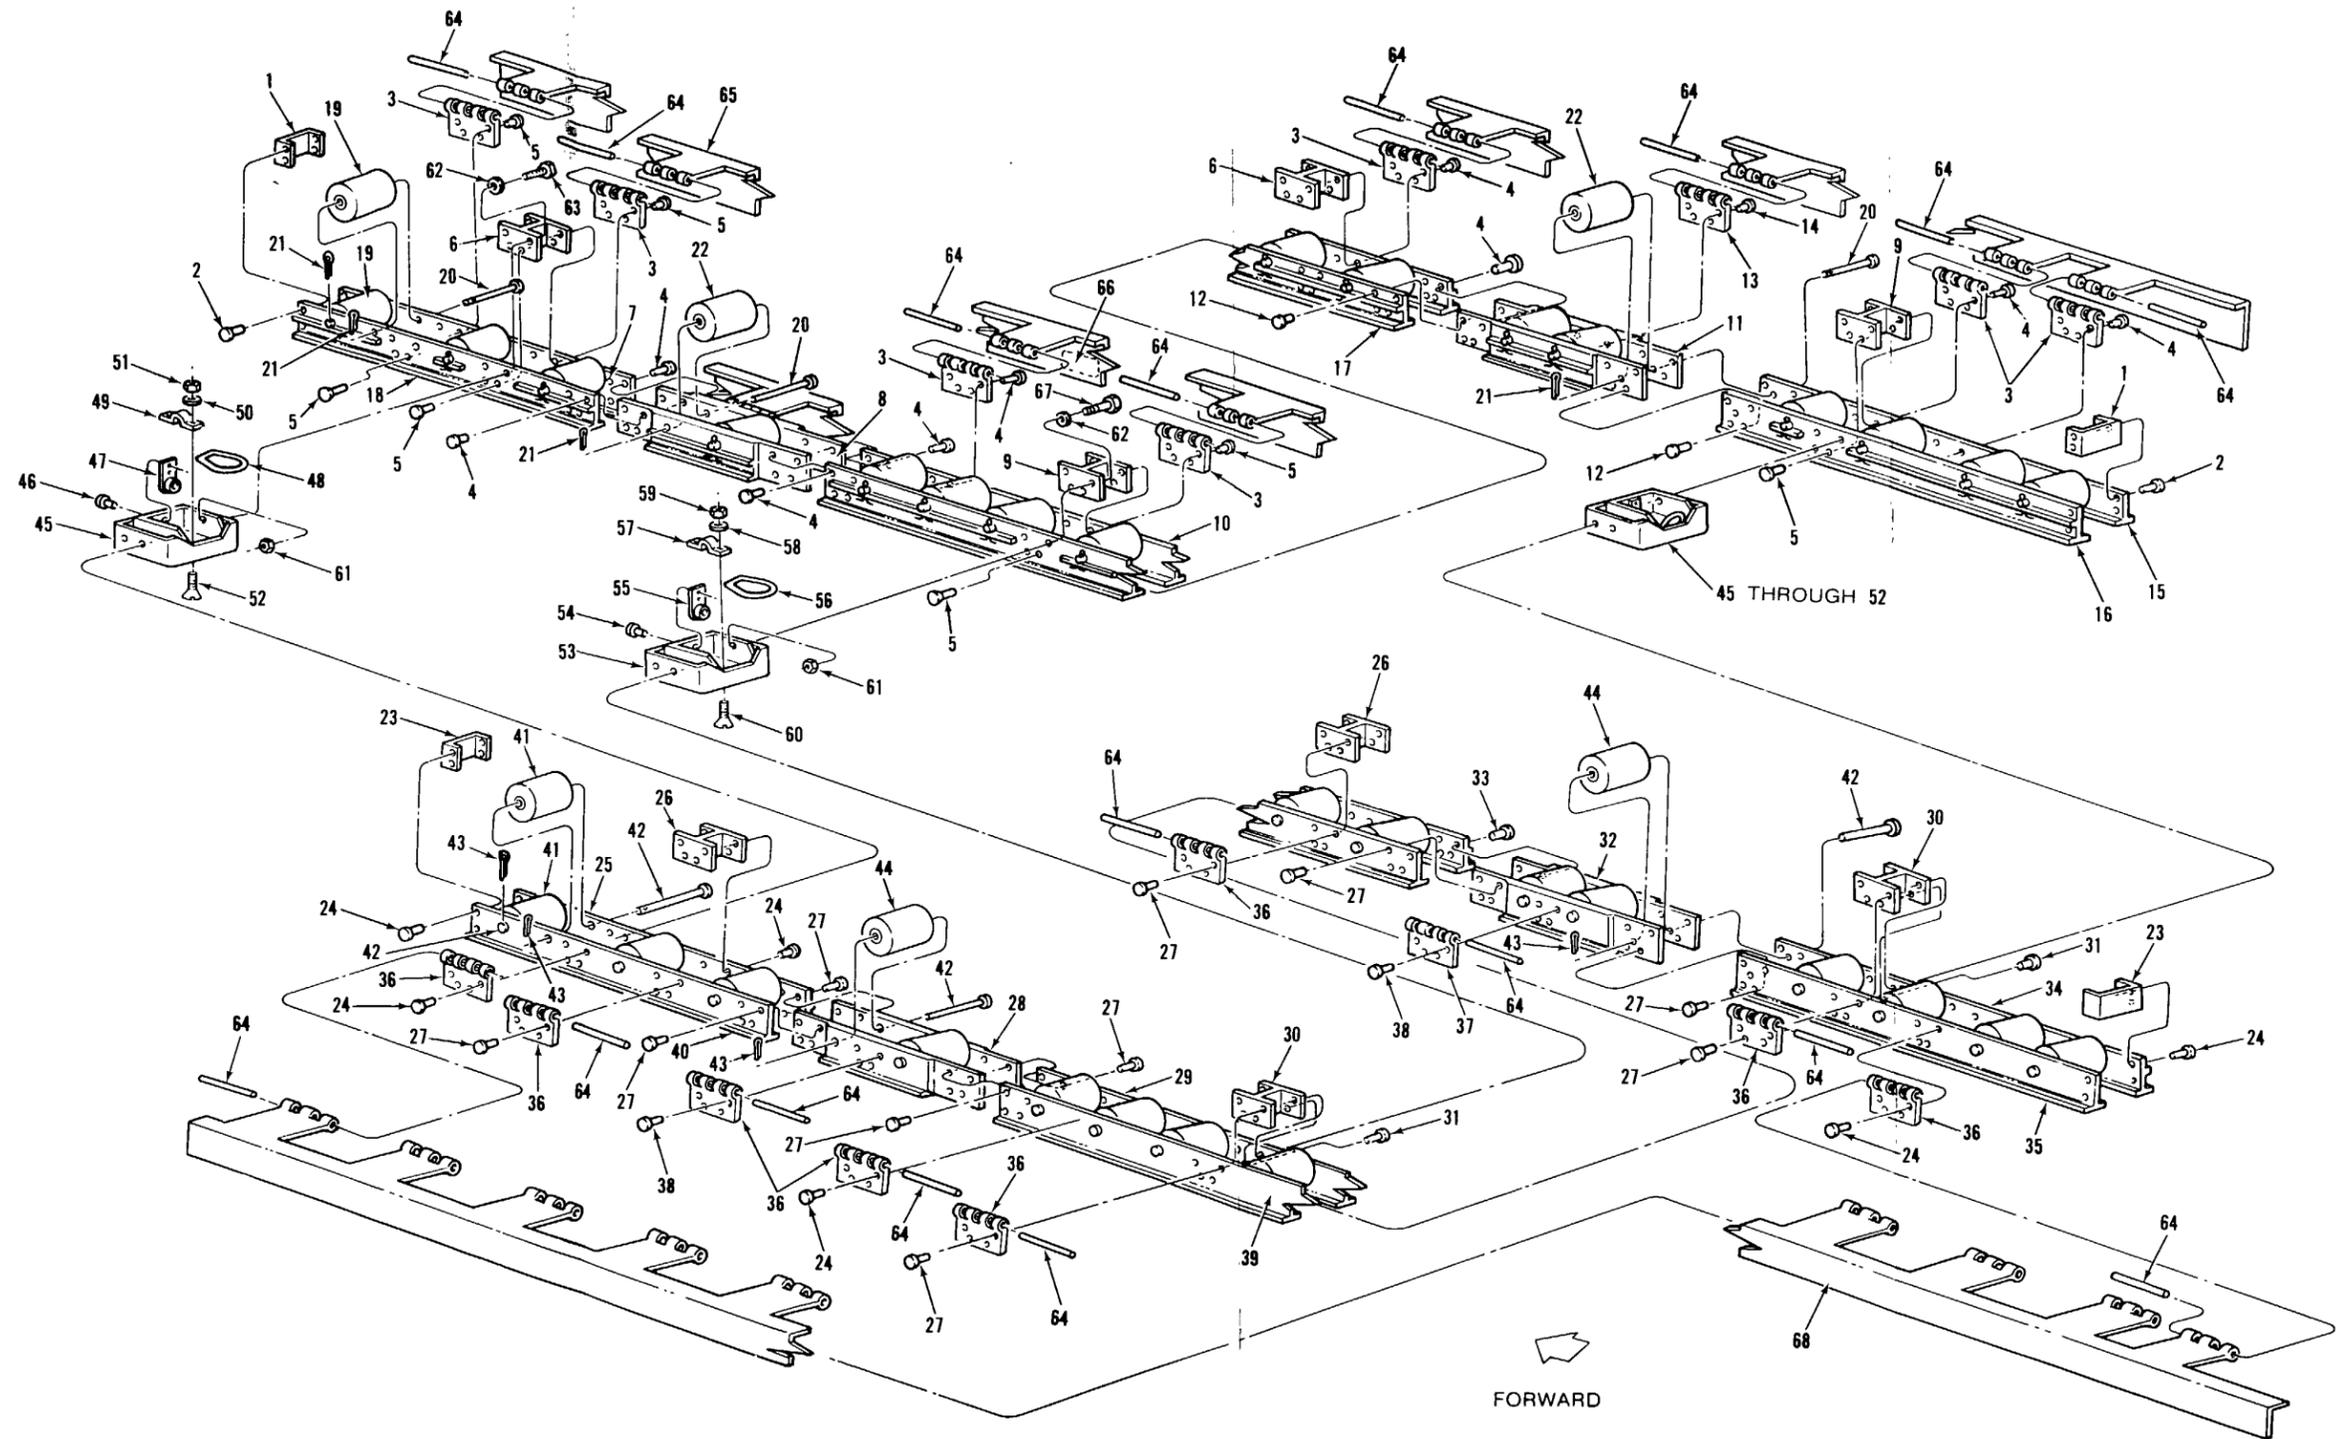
Inboard Guide/Roller Assembly Stations 157.750 to 272.188
